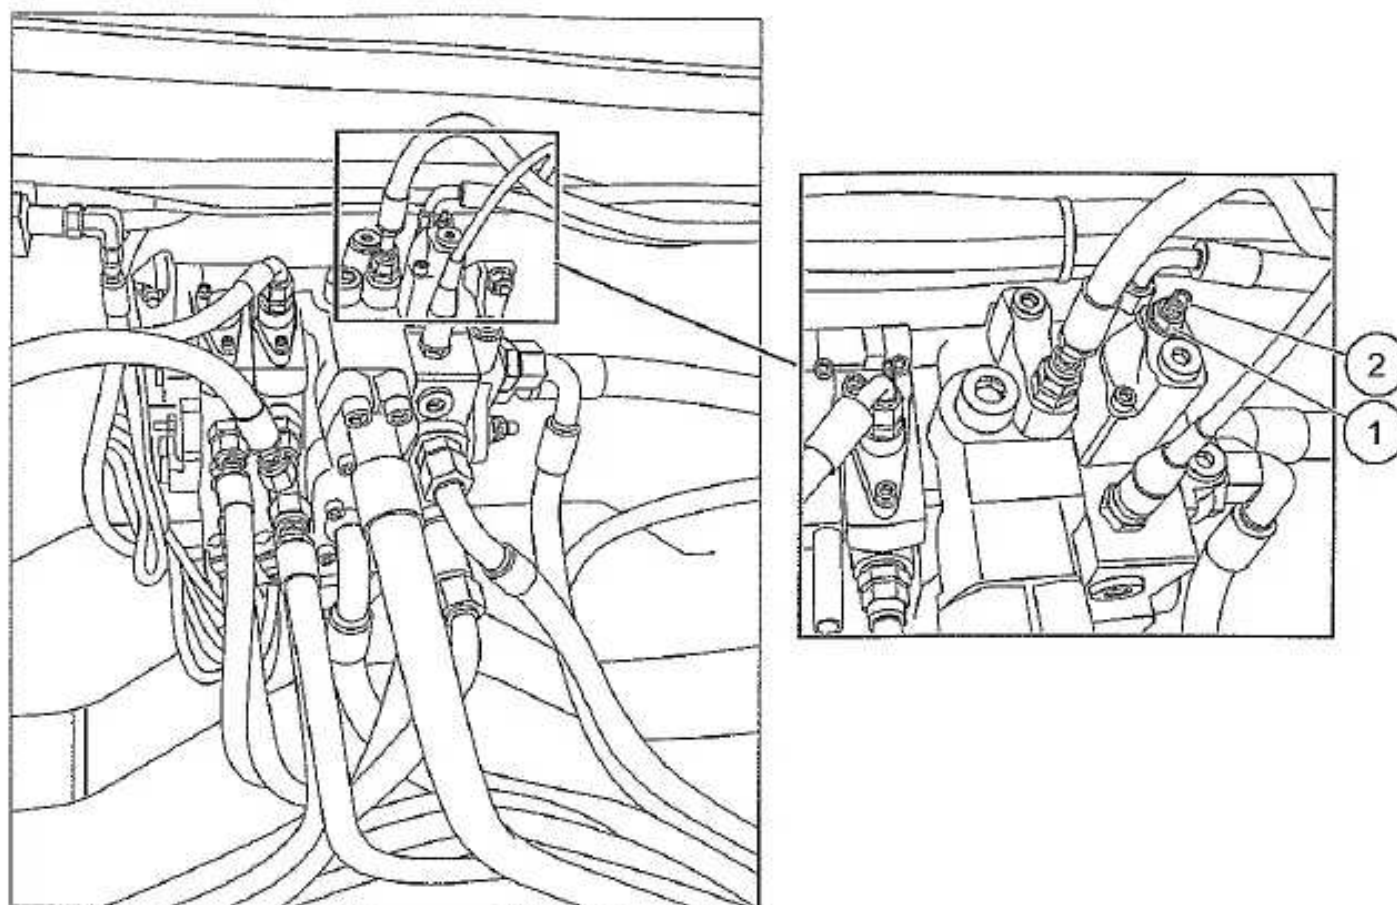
Emergency lowering for SMV 18-60 , K220/L90 main valve
